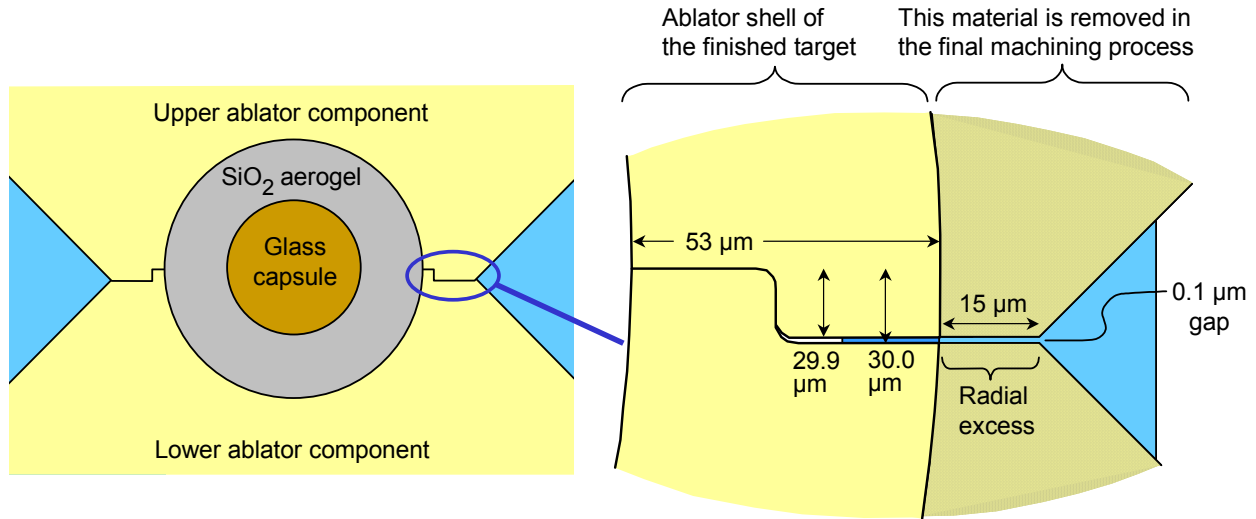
Assembled target components (left) and an enlarged view of the joint design (right)
